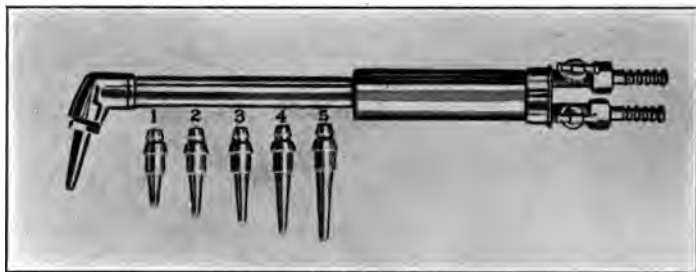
SMALL STYLE C WELDING BLOWPIPE, No. 453.
